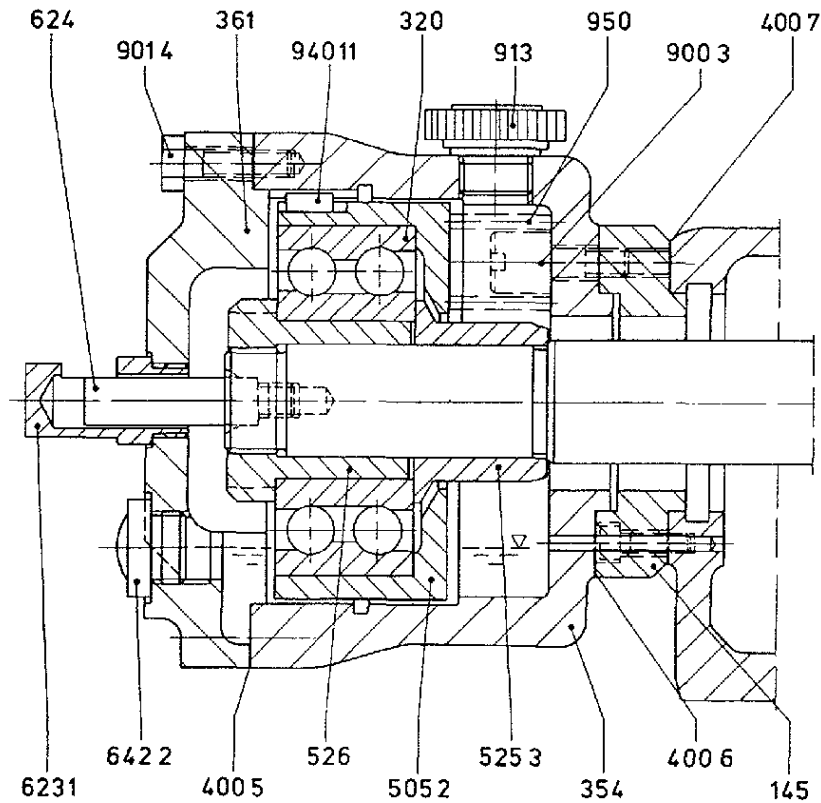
Lift-off device with roller bearings for pumps with plain bearings
